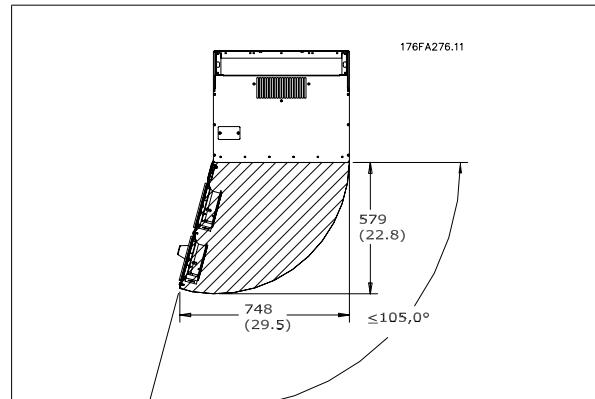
Space in front of IP21/IP54 enclosure type, frame size E1.
